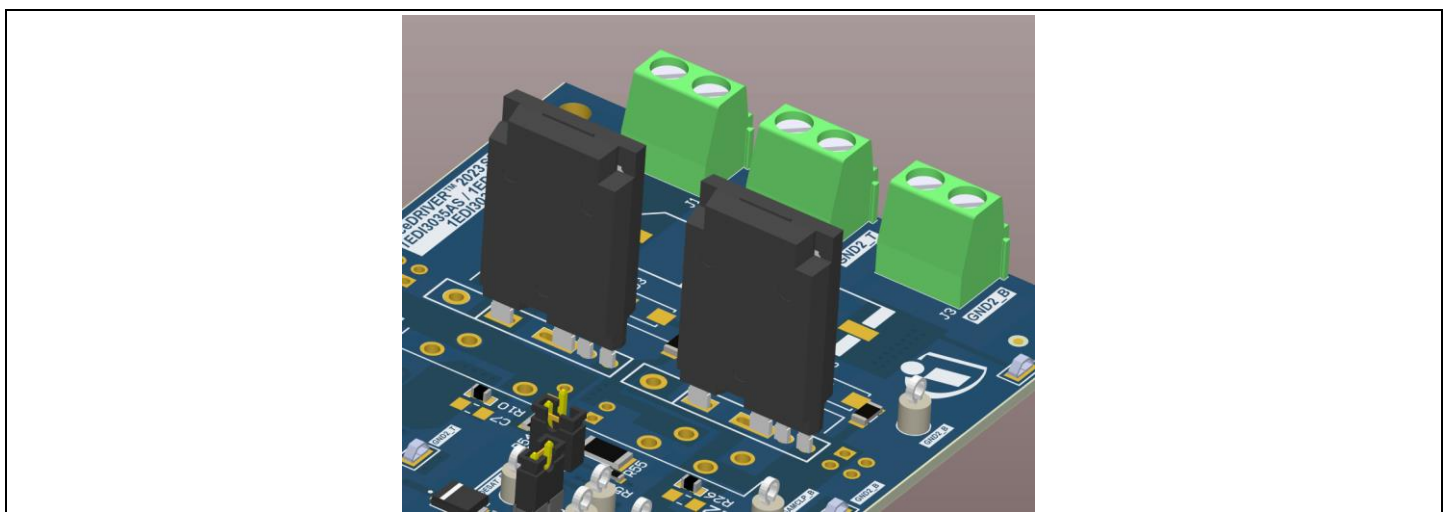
TO247-4 CoolSiC™ MOSFET mounted
